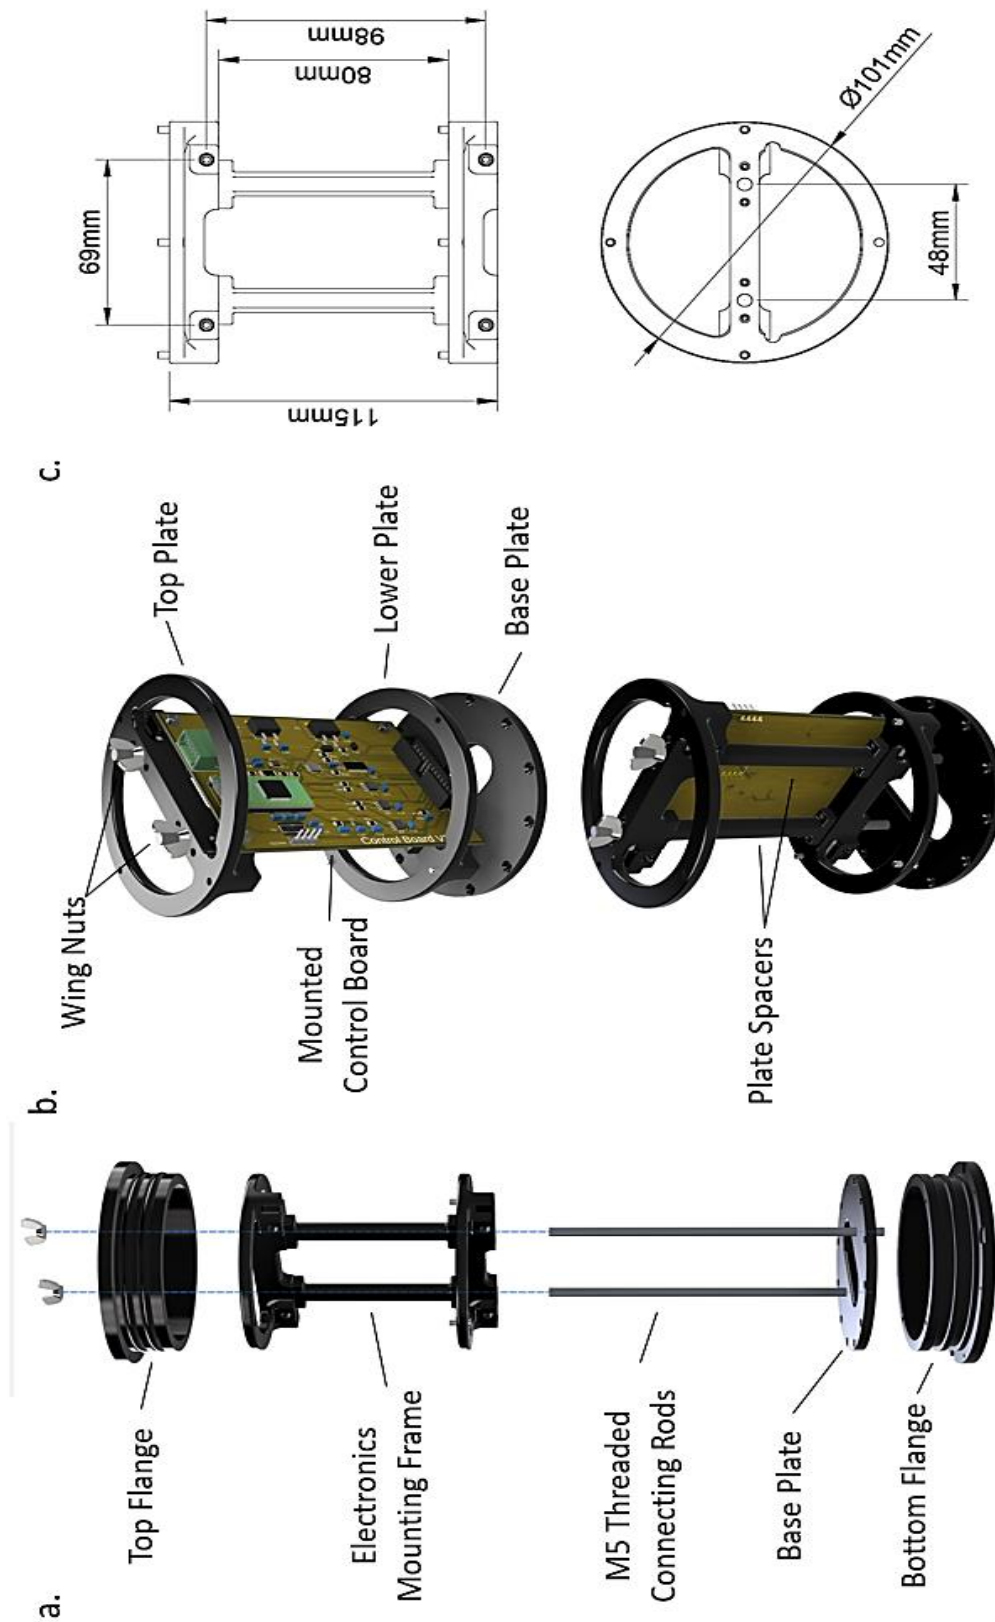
Internal frame and electronics mount design with (a) an exploded and labelled view of the internal frame assembly (b) labelled views of internal frame and electronic board mounted and (c) dimensioned drawing of the electronics mounting frame.
